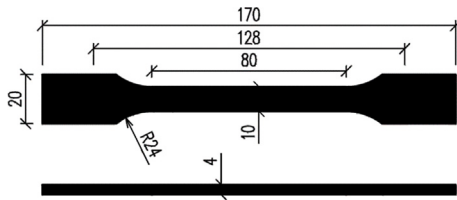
Geometry of the specimen for uniaxial tensile testing. All dimensions are in mm.
